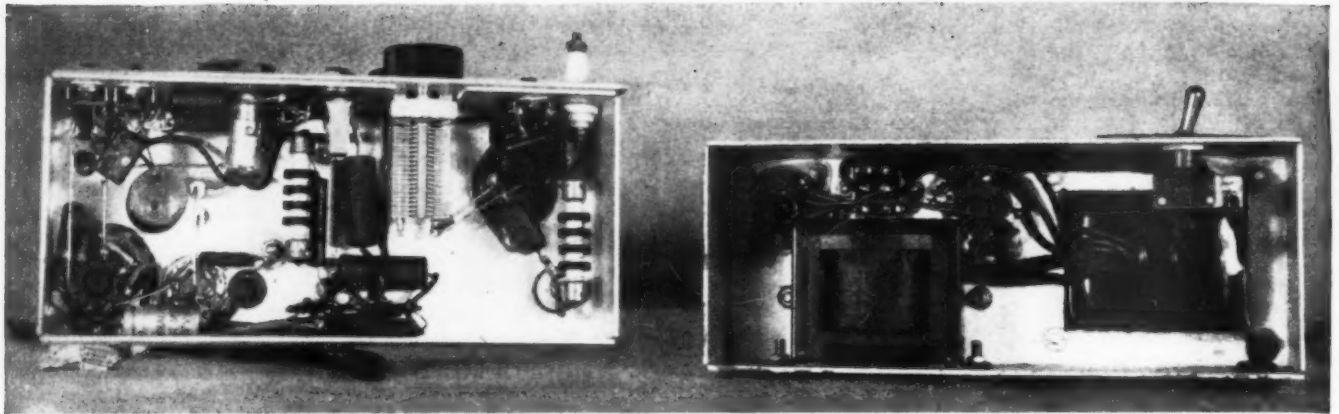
Under-view of both chassis. All components should be spaced properly and wired so that no interaction will occur.
